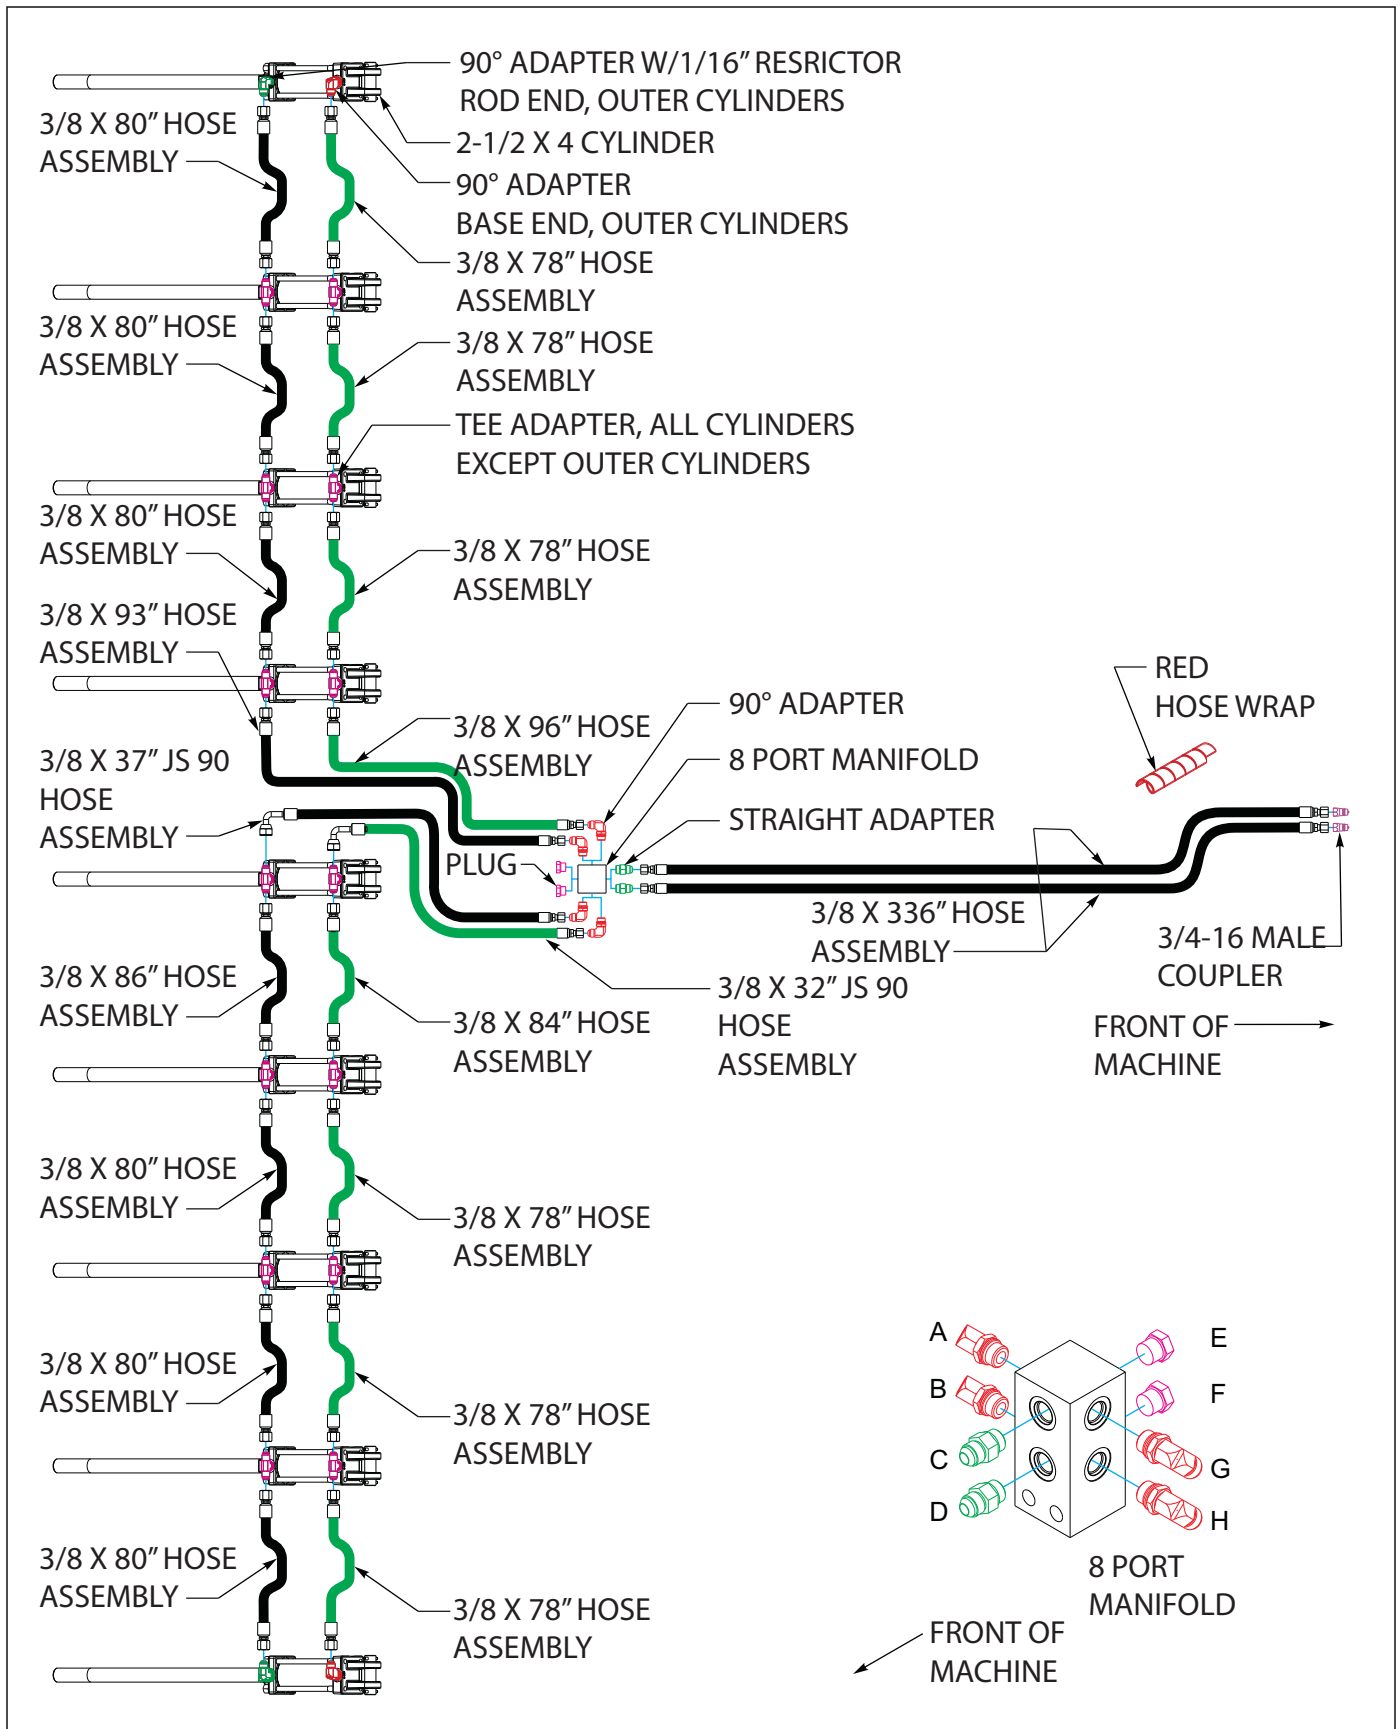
Traylor Hydraulic Installation 1790-52'
